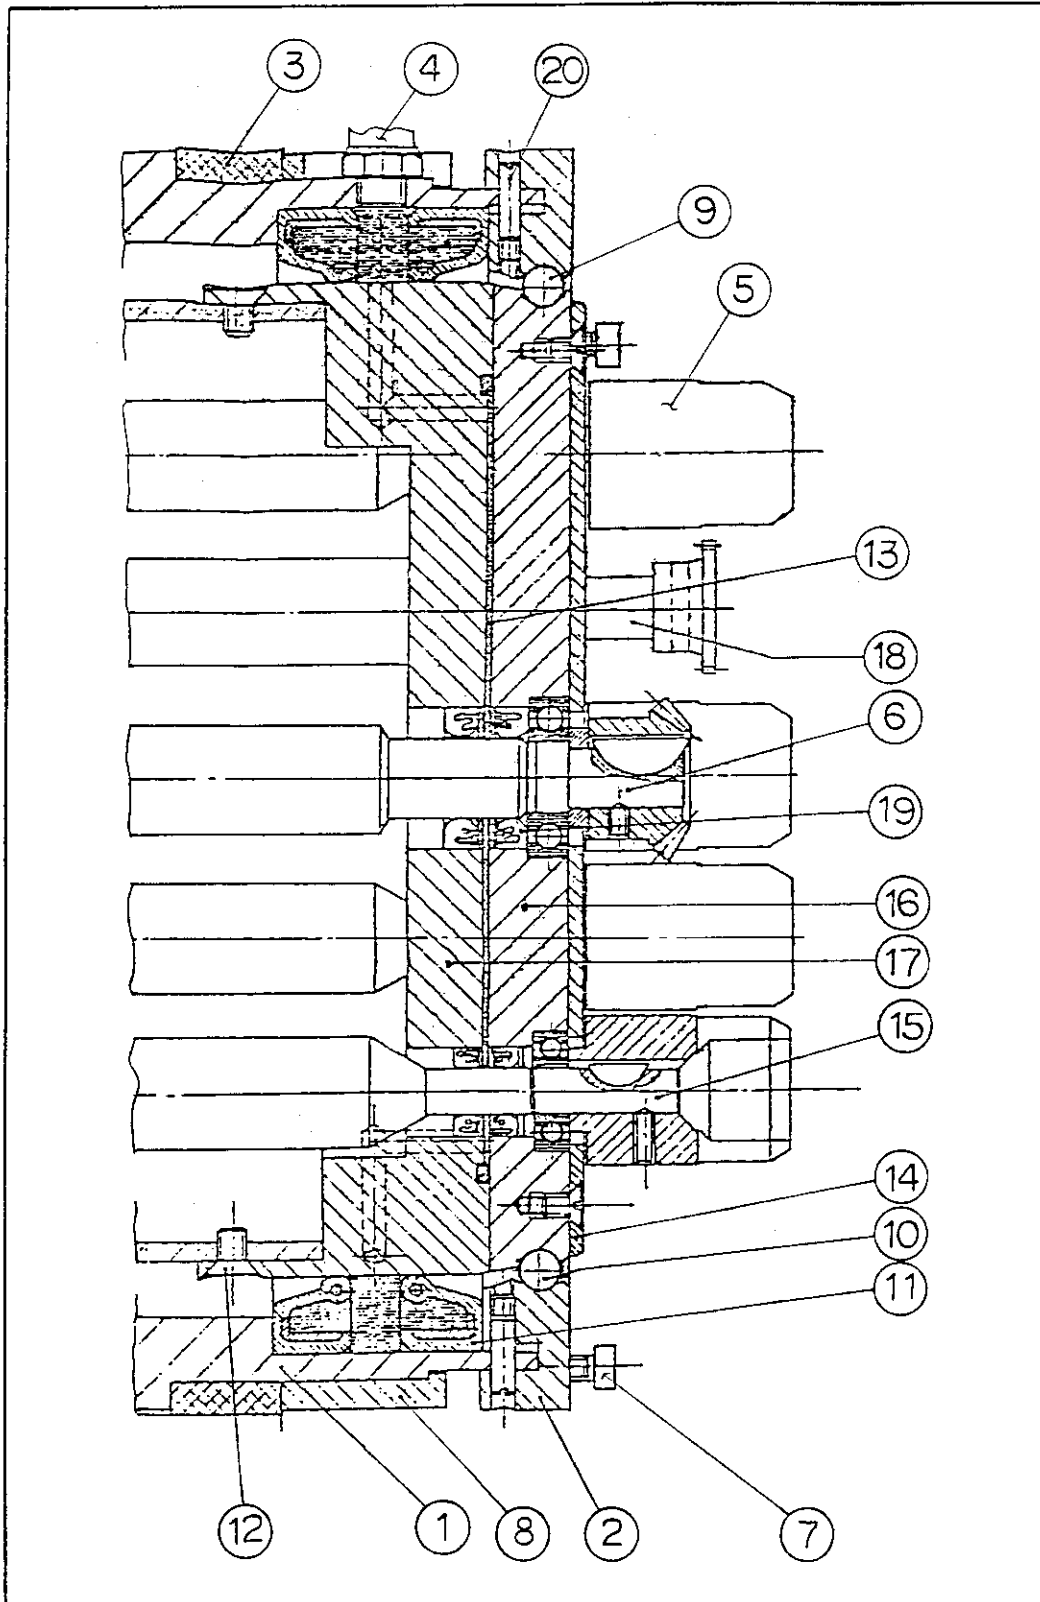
Detail of the gas-proof mechanism of through-wall assembly
